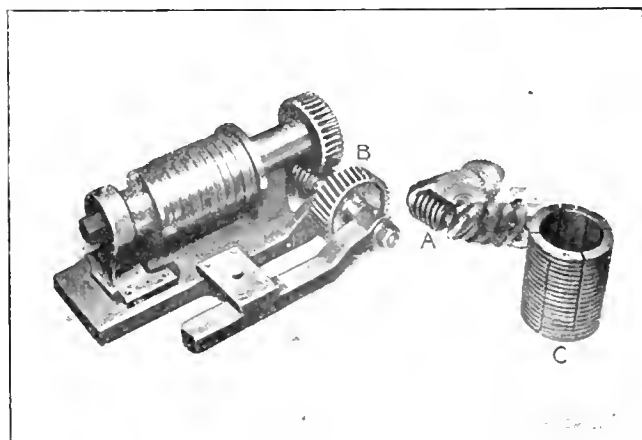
Milling Fixture and Tools for Cutting off Piston Rings
